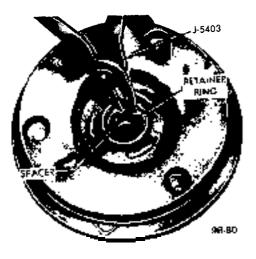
B-106 Removing or Installing Retainer Ring in Clutch Drive Plate
